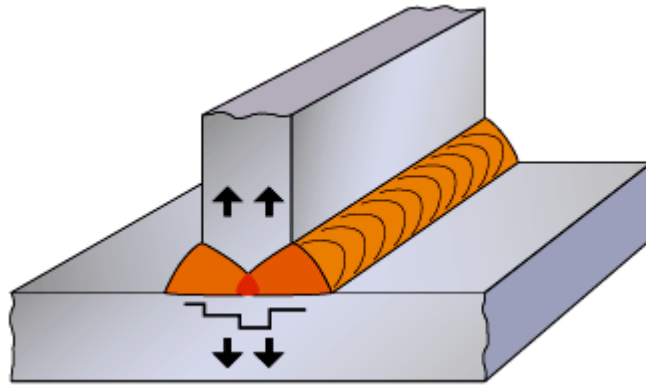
Lamellar tearing in T butt weld. (The welding institute 2010.)
